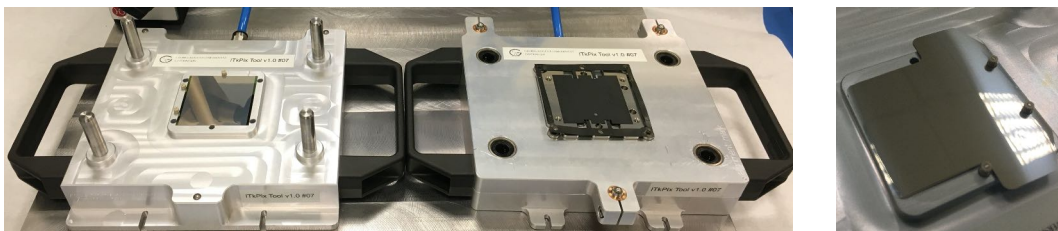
Quad module assembly tooling V1.0 (left) and $2 \times 20\mu\text{m}$ stainless steel gauge sheet spacers used for glue layer thickness control (right).
